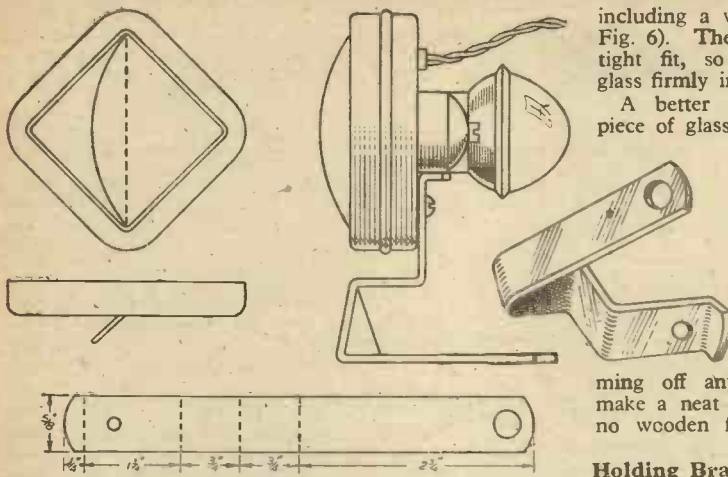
Details of the lid and metal supporting bracket, and side view of the complete lamp.
